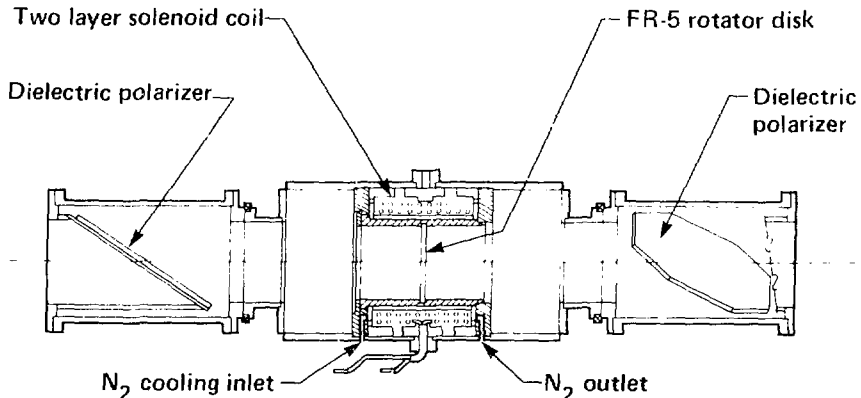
31.5 cm Faraday rotator and polarizer assembly
